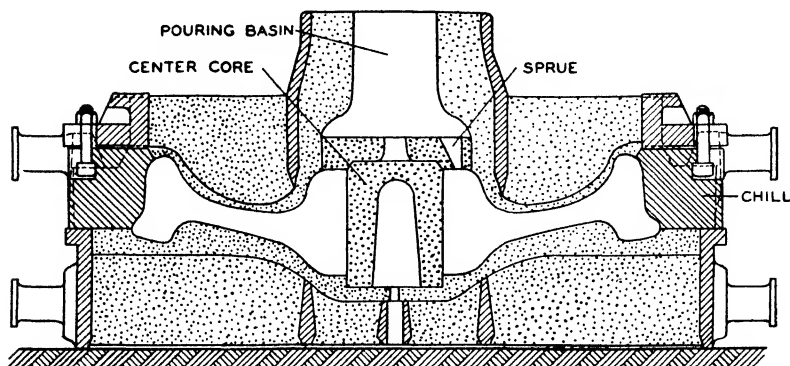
MOLD FOR CHILLED CAST-IRON CAR WHEEL
